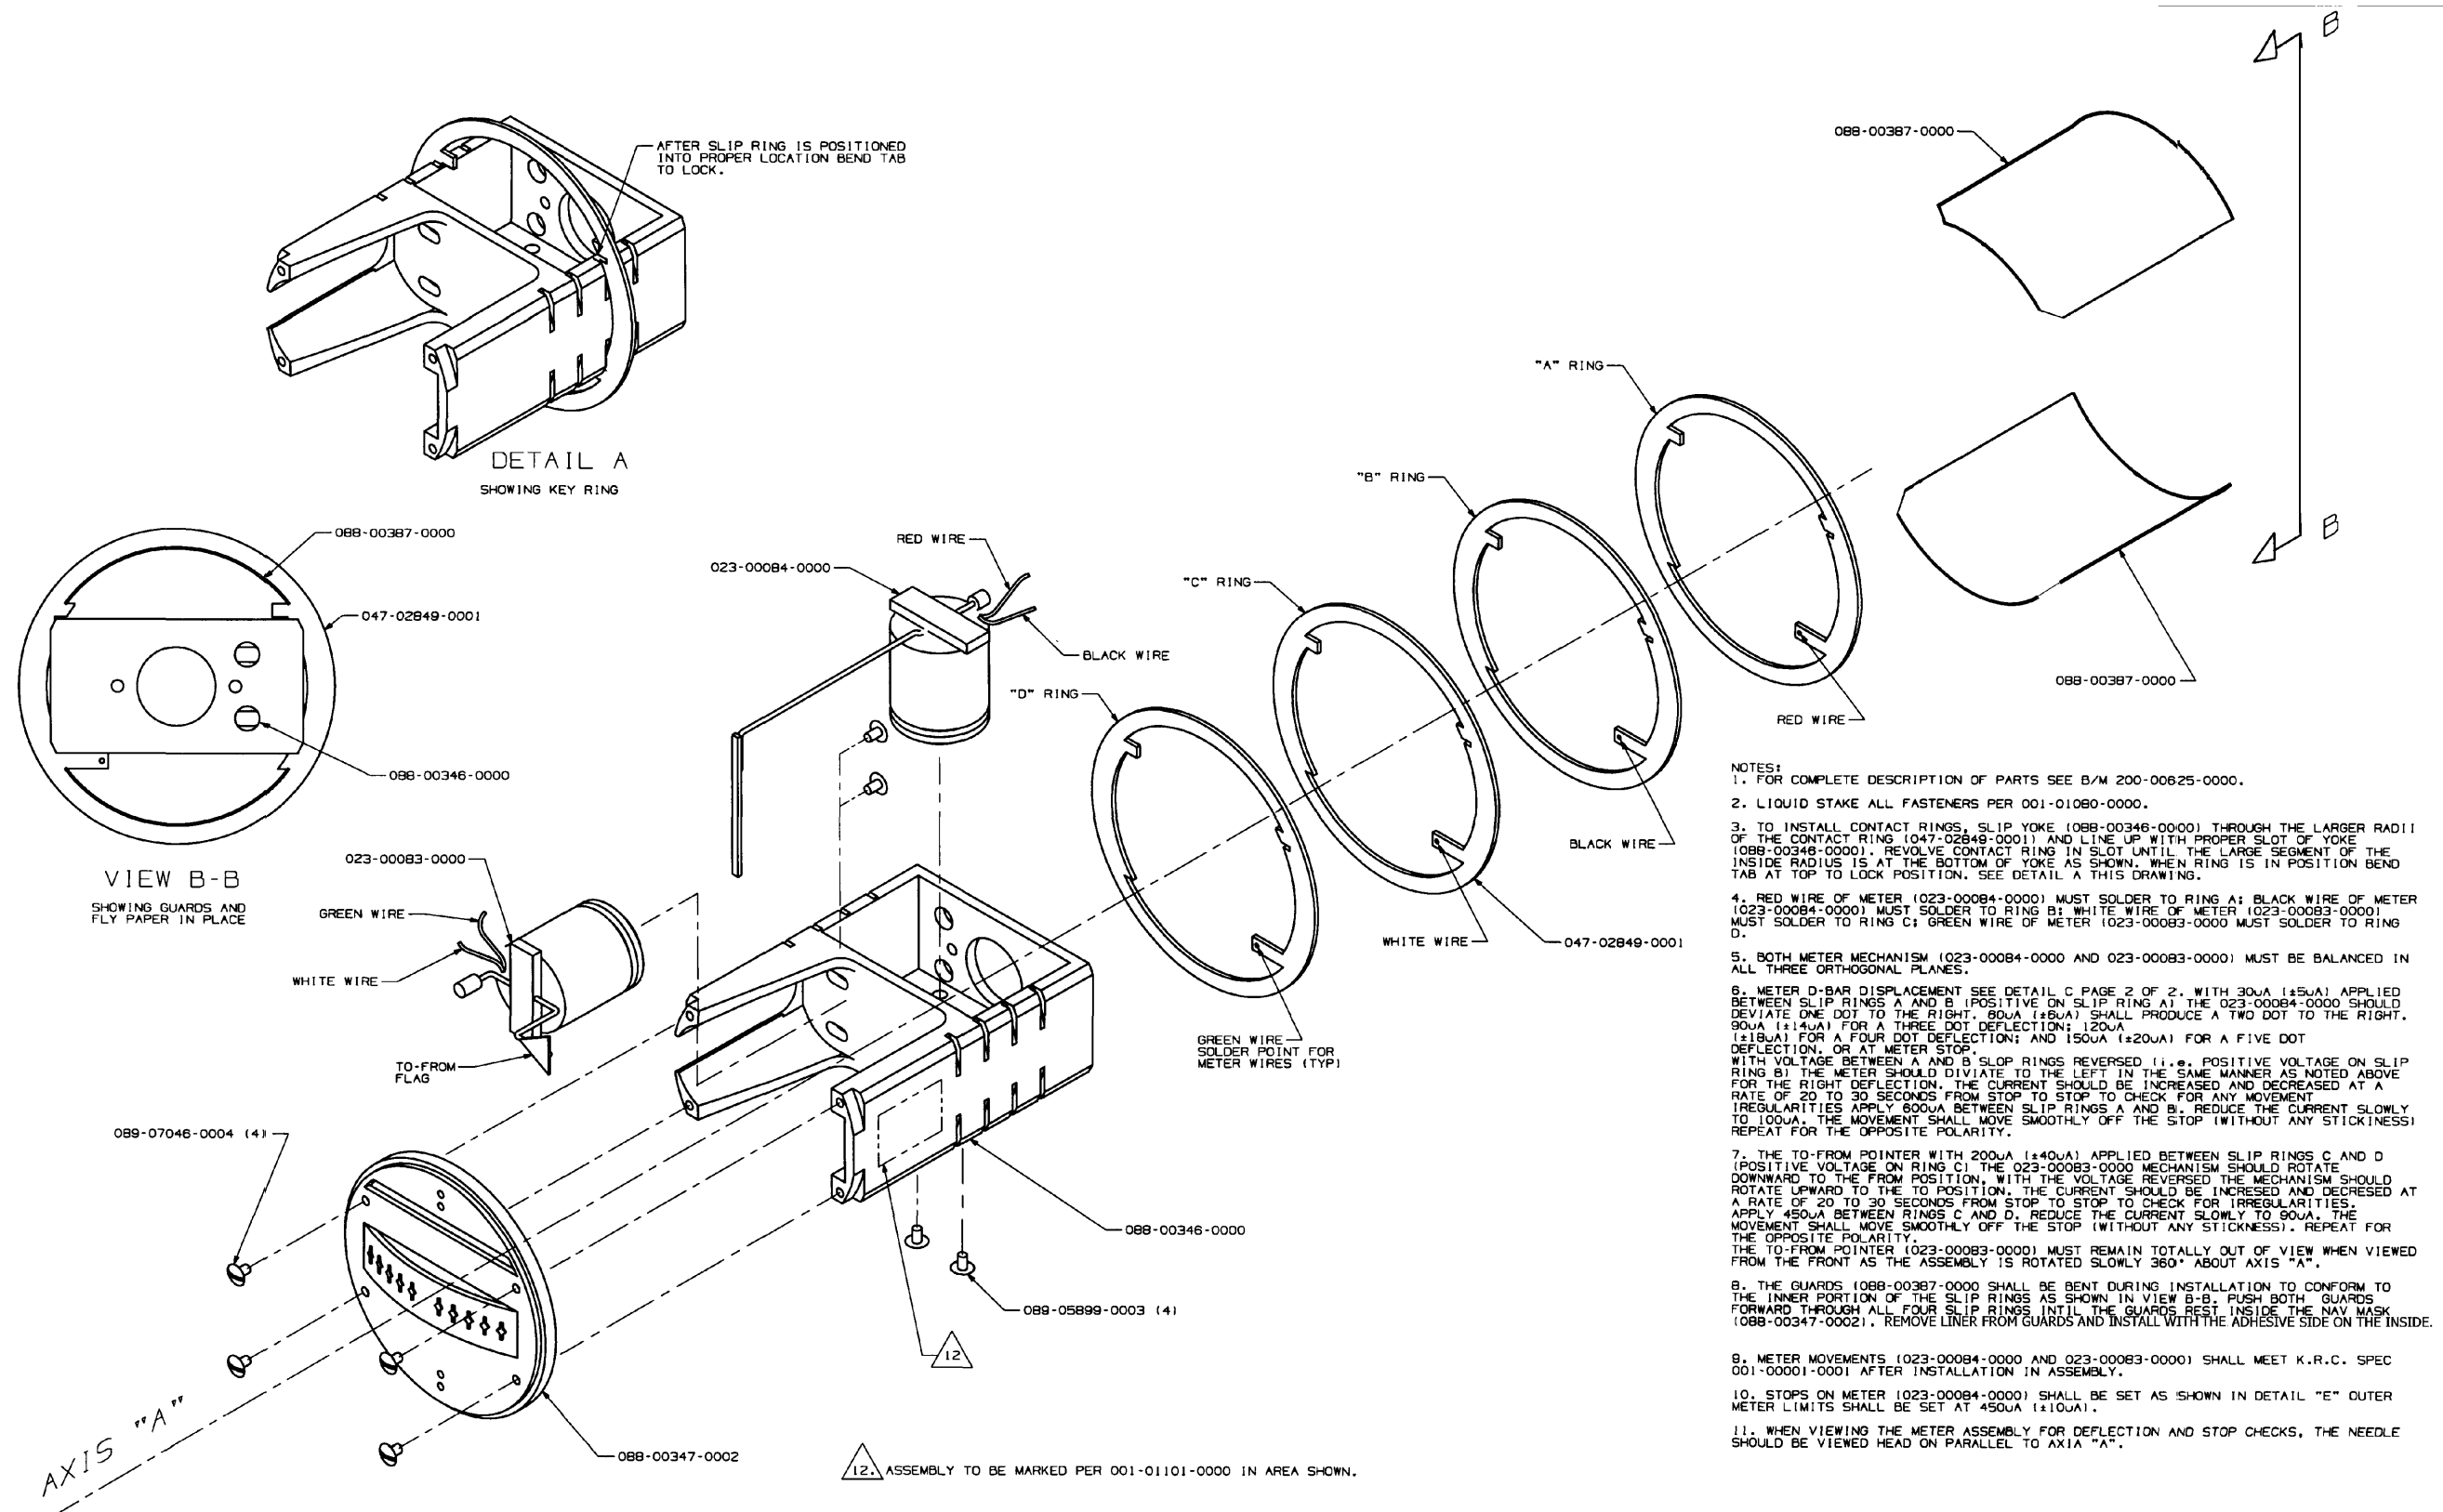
A KI 525 SYNCHRO PLATE ASSEMBLY
